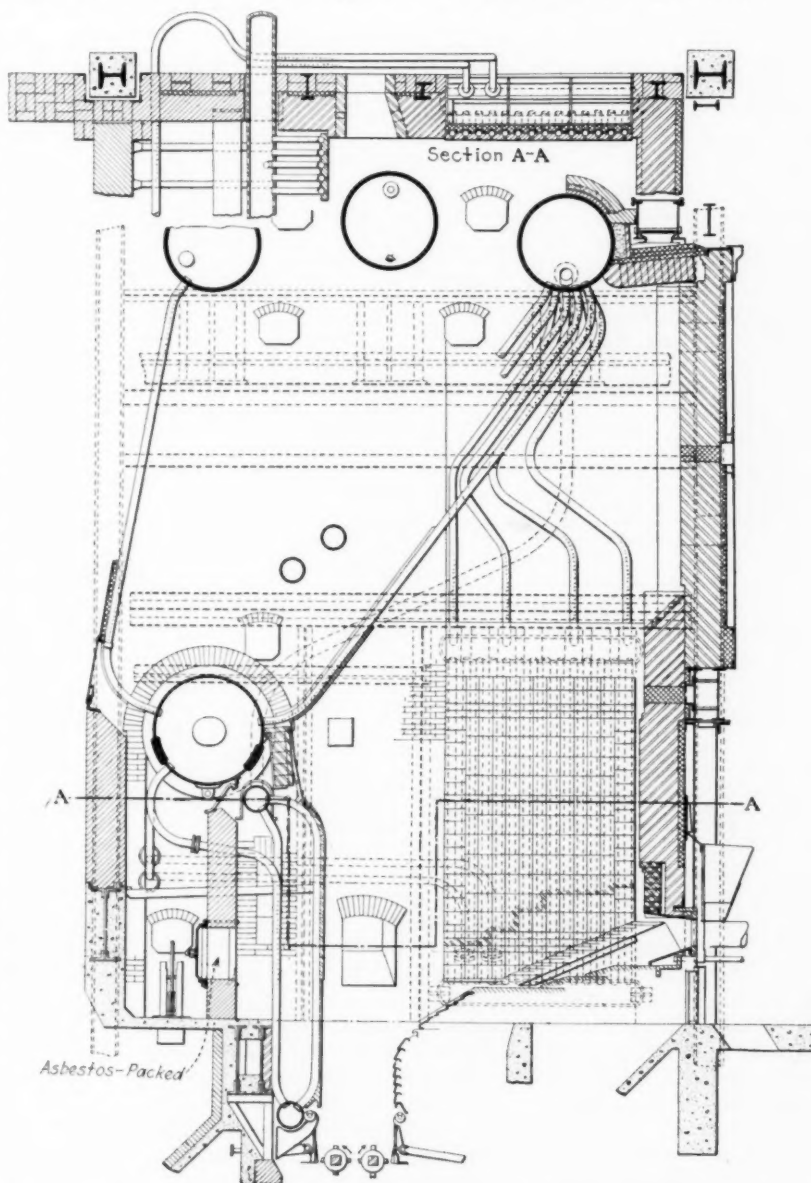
CROSS-SECTION OF BOILER NO. 7 AT CHESTER STATION AFTER INSTALLATION OF WATER WALL
